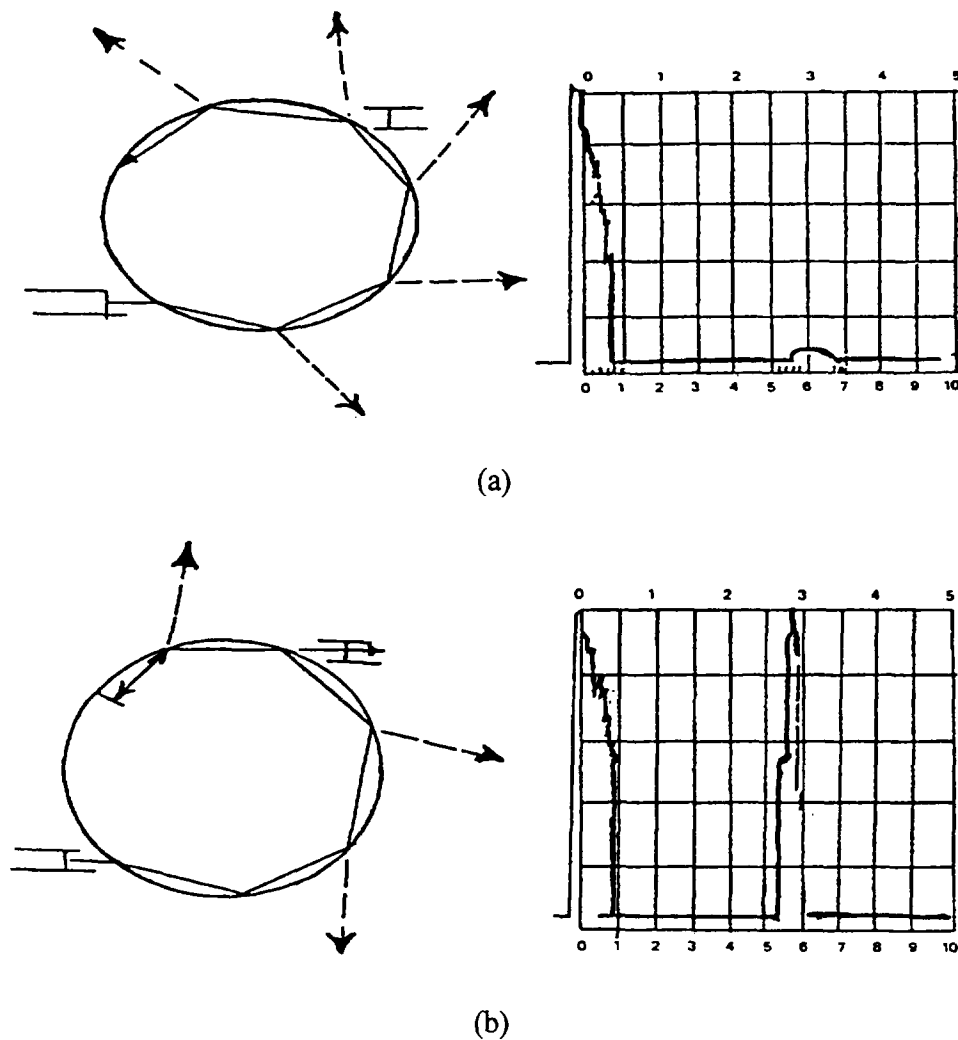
Testing of rod material by immersion technique with separate transmitting and receiving probes; (a) rod material with no surface flaws, (b) rod material with a surface flaw.
